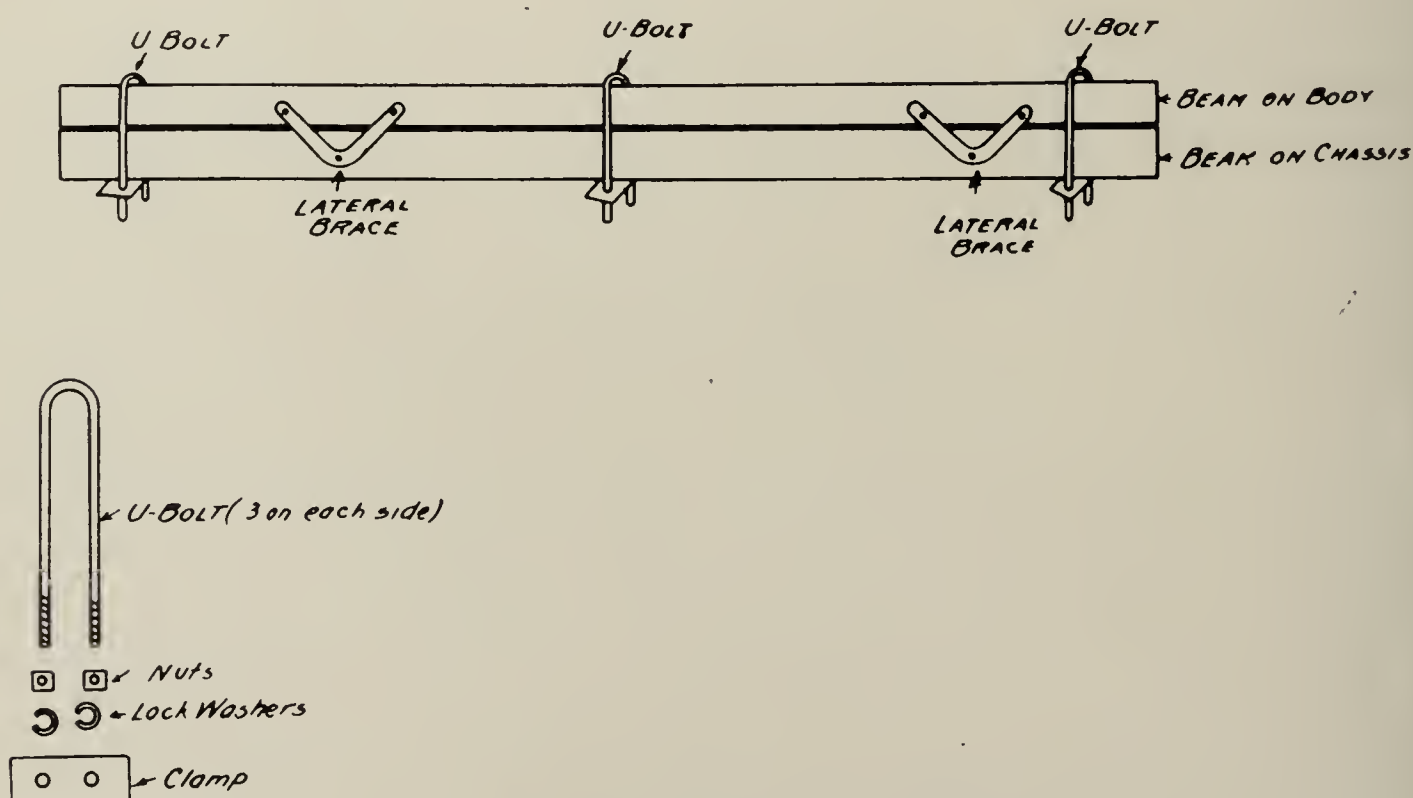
METHOD OF ATTACHING BODY TO CHASSIS
